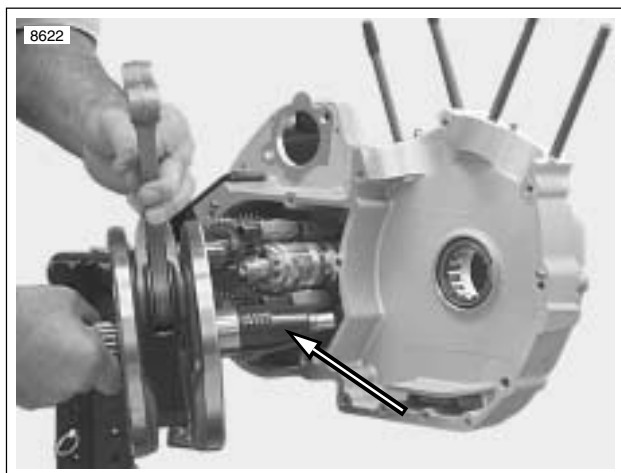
Installing Flywheel Assembly Using Crankshaft Guide Tool (Part No. HD-42326)
